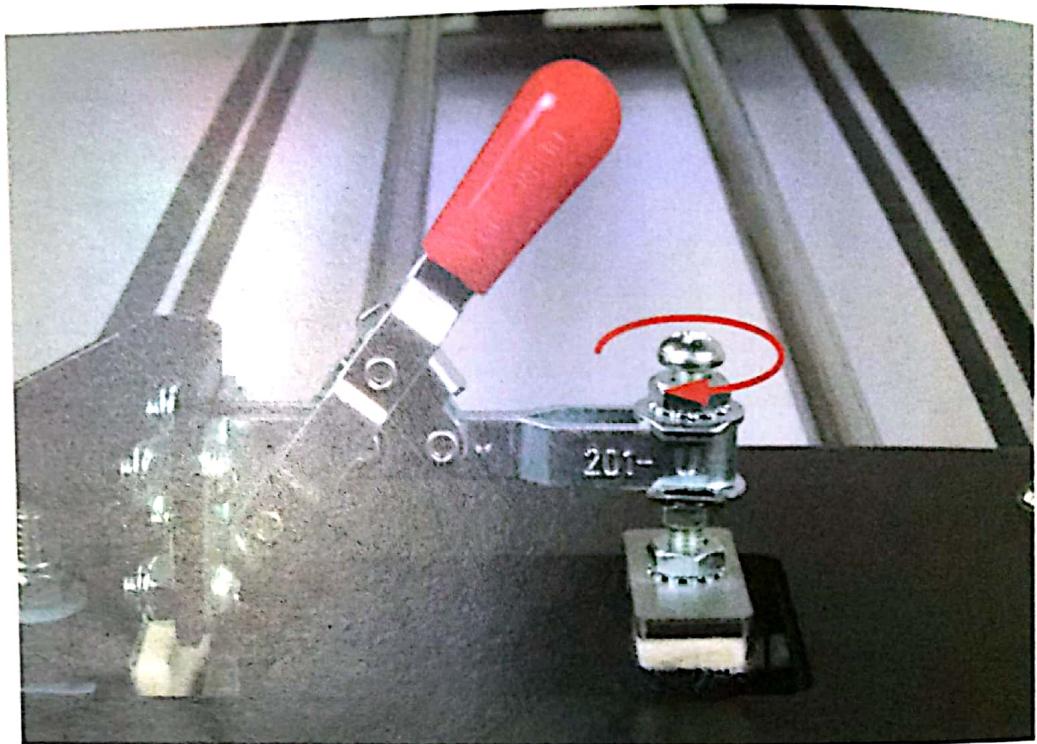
Breaking set screw adjustment for loaded motor measurements.
